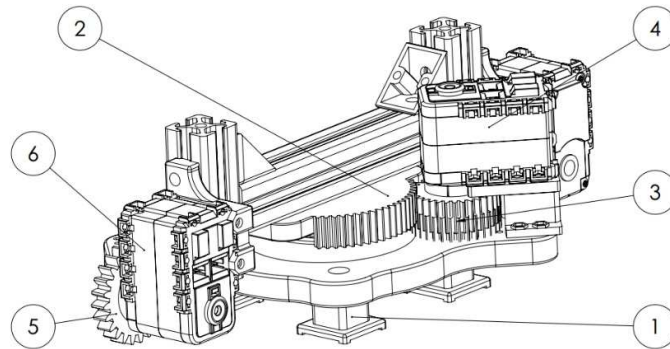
Railbot prototype for 2D scaffolds. 1- Slider; 2- Big gear for the motor orientation control; 3- Anti-backlash gear for the motor orientation control; 4- Motor responsible for switching the driving motors' orientation; 5- Driving gear; 6- Driving motor.
